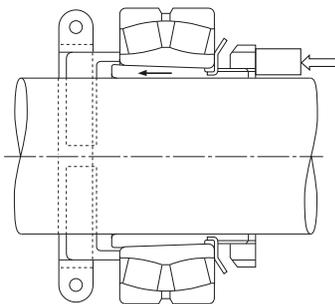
Removal of Adapter With a Stop and Axial Pressure
